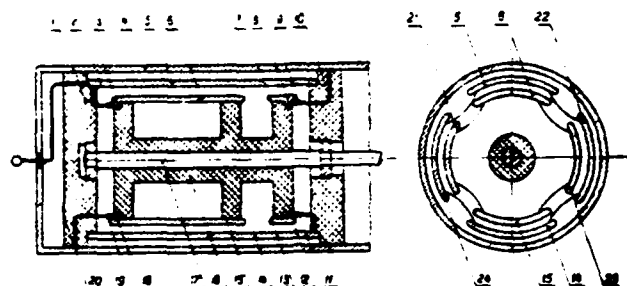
Diagram of self-excited generator: 1, 10 - flanges; 2, 9, 11, 19 - brushes; 3, 8, 12, 18 - collector plates; 4 - casing; 5, 14, 22, 24 - stator plates; 6, 15, 21, 23 - main rotor carriers; 7, 13 - auxiliary rotor carriers; 20 - high-voltage outlet.
